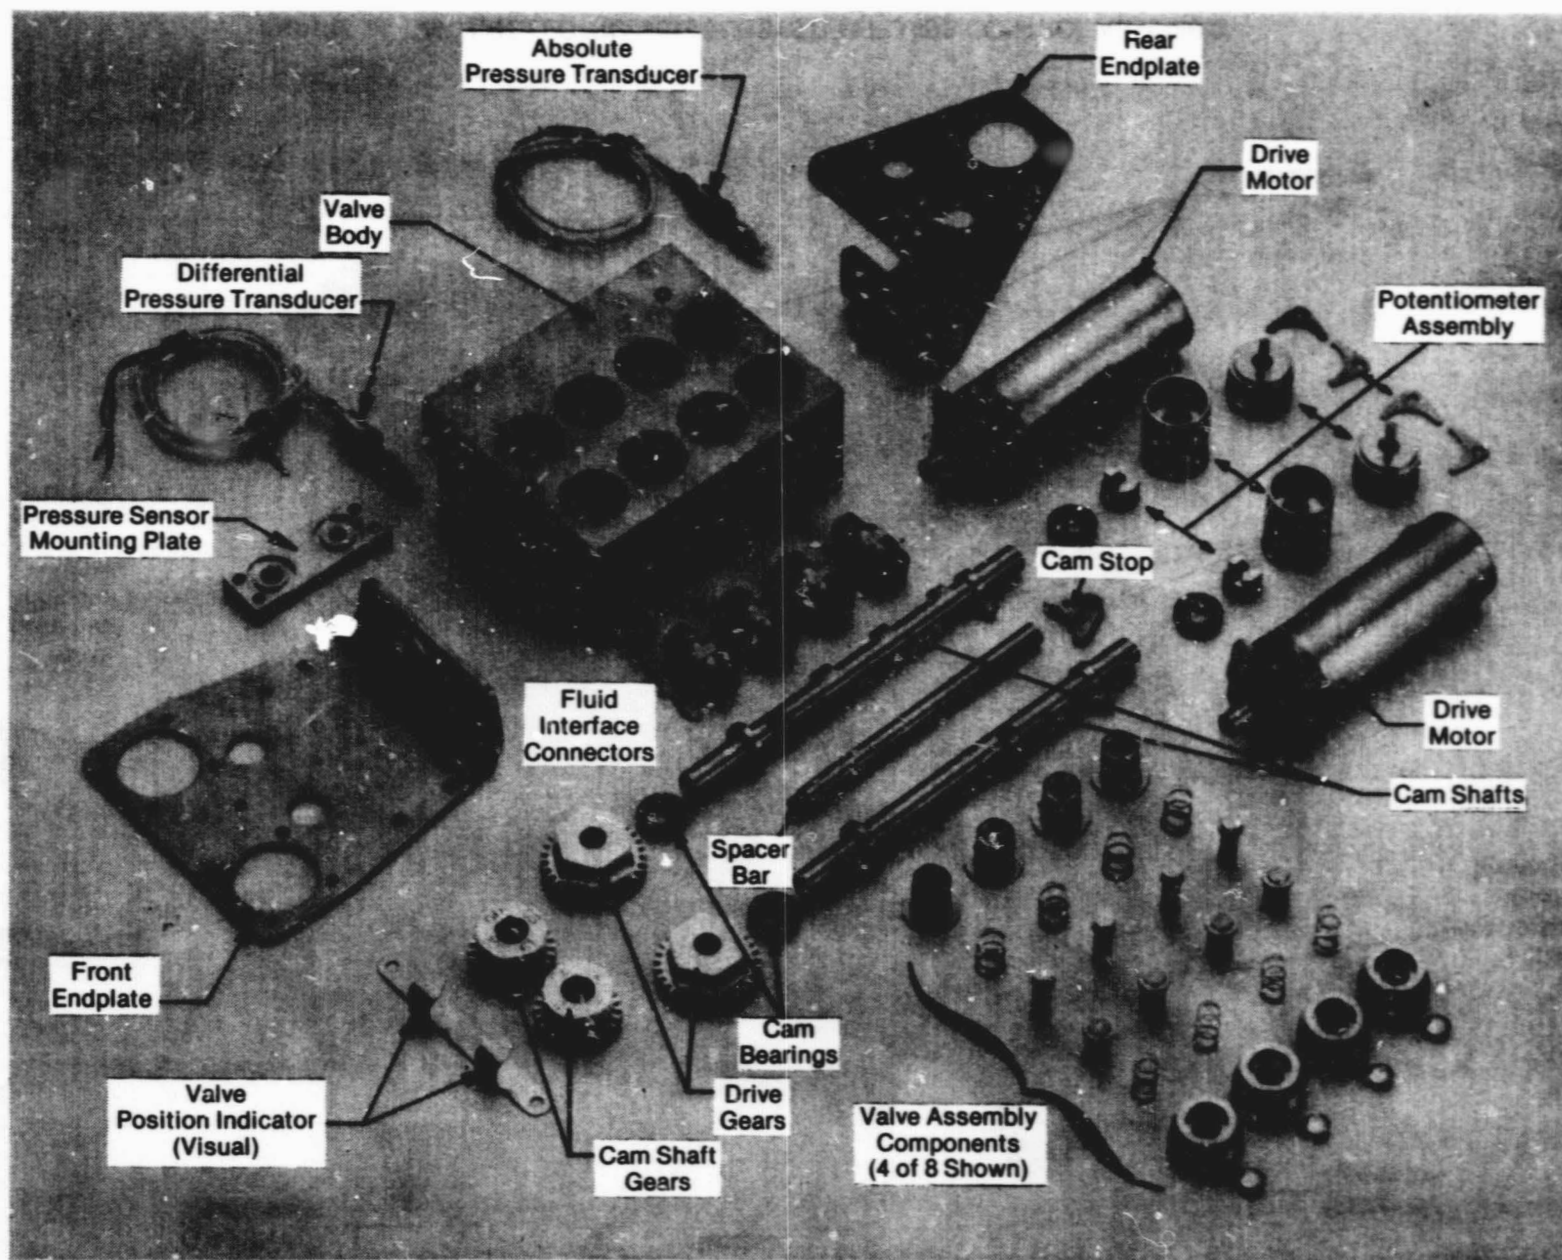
WATER ELECTROLYSIS FLUIDS CONTROL ASSEMBLY — EXPLODED VIEW
